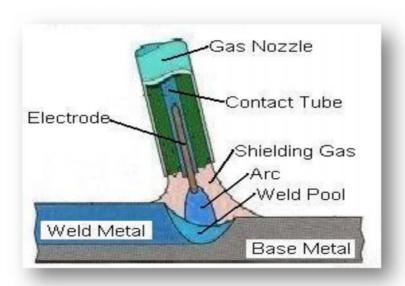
MIG welding Source: weldingengineer.com
